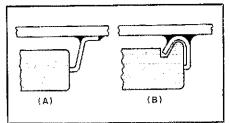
SMD lead variations. Gull-wing leads (A) are inspected easily; they can be accessed with test probes. The J-shaped counterparts (B) have a smaller PC-board footprint and are handled easily by automatic feeding machines.
